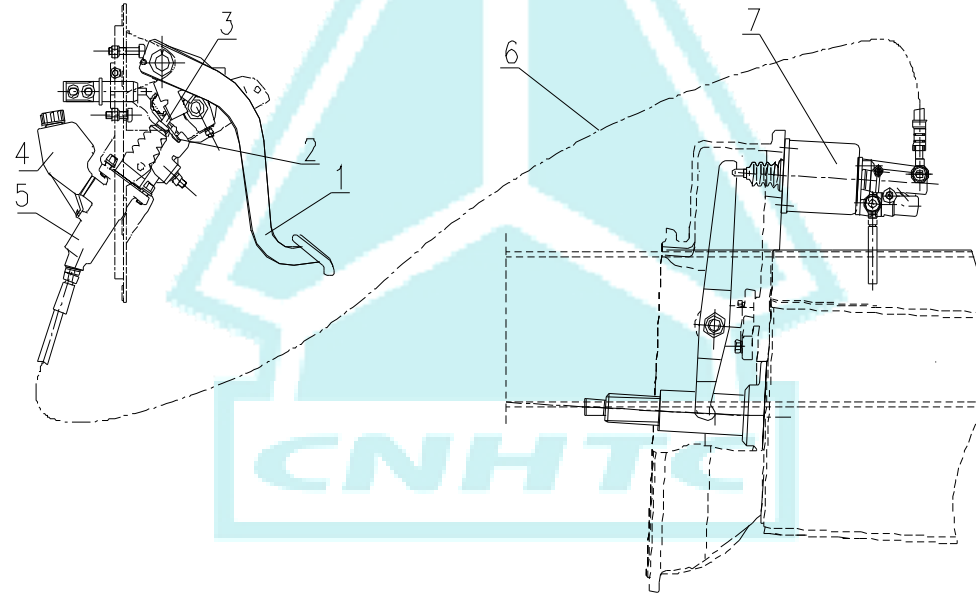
Assembly Drawing of Pull-type Clutch Operation System
